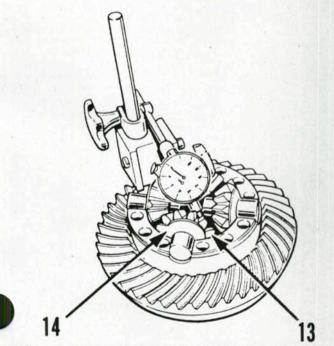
Use a dial indicator to measure backlash between differential bevel gears (13) and side gear.
